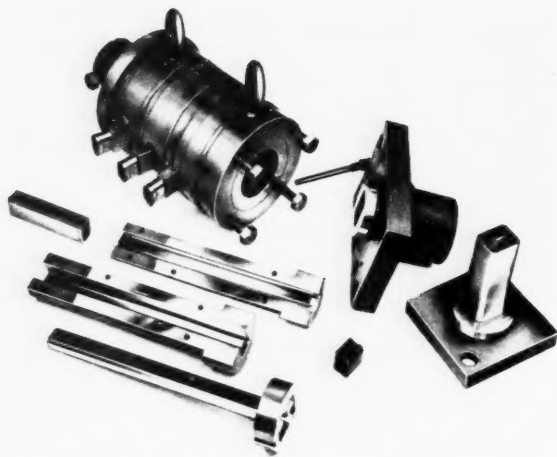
Extrusion Die with Punch and Mandrel Exposed
